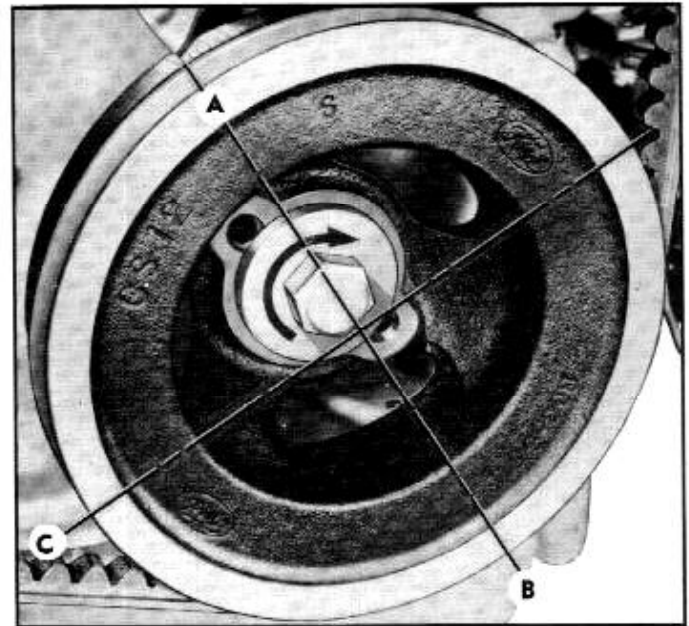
C-13—Quadrant for Valve Clearance Adjustment
